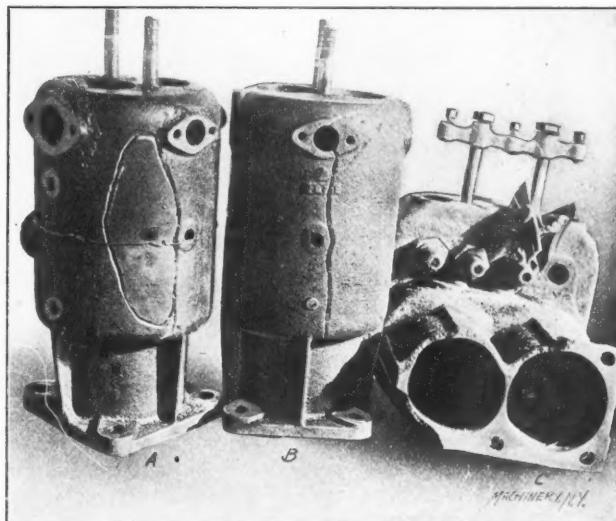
Two Cylinders with Cracked Water Jackets prepared for Welding. Twin Cylinders with Broken Flanges to be Welded.
